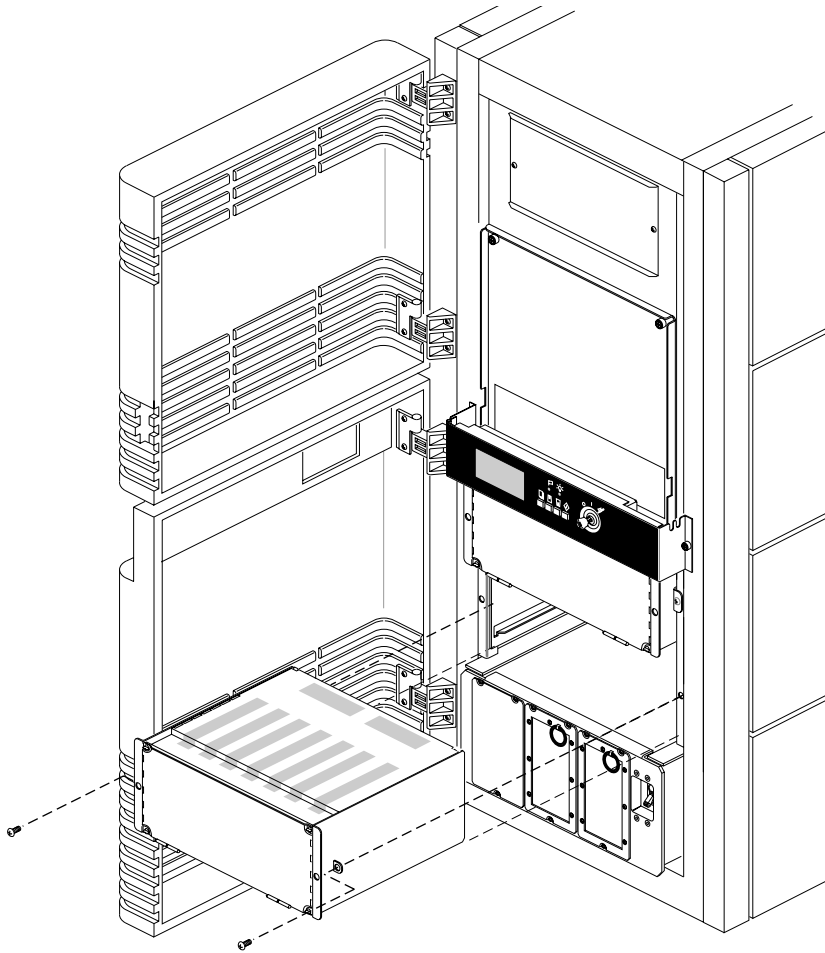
Installing the Optional RAID SCSI Drive Box
